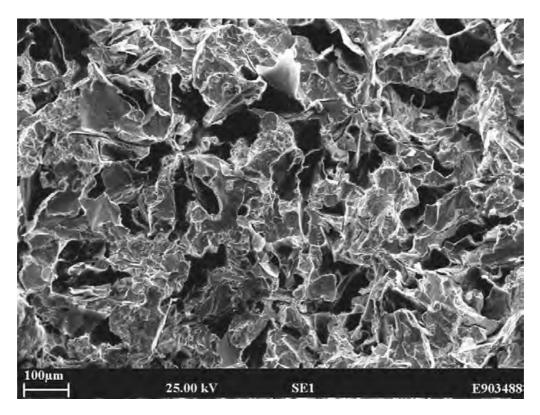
SEM fractograph, showing fractographic detail of the piece shown in figure 58 and comprising graphite flakes (black) in a brittle cleavage fractured iron matrix (grey).
